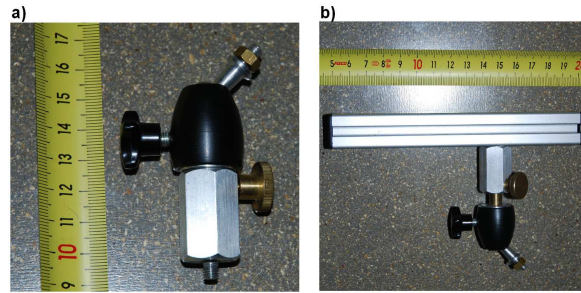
a) Joint with Al piece and fixation screw. b) Mounted on piece of ITEM rod.
